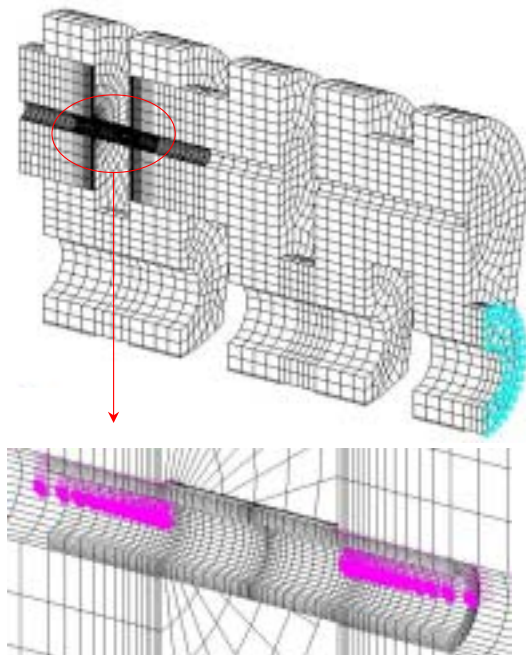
FE model of lifting pin with inner hole and crank shaft
